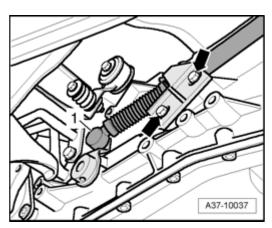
Pressing Ball Socket Of Selector Lever Cable From Selector Shaft Lever & Removing Bracket On Transmission
